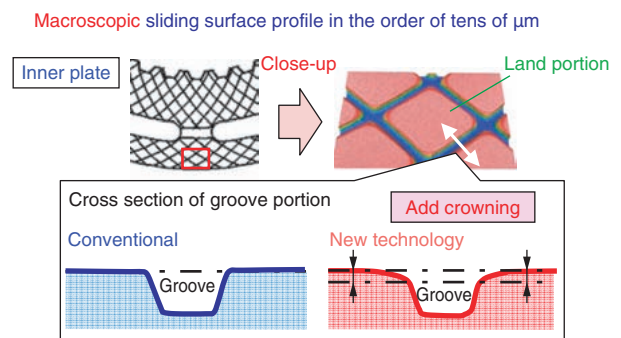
Reducing drag torque by adopting macroscopic sliding surface profile (crowning)
